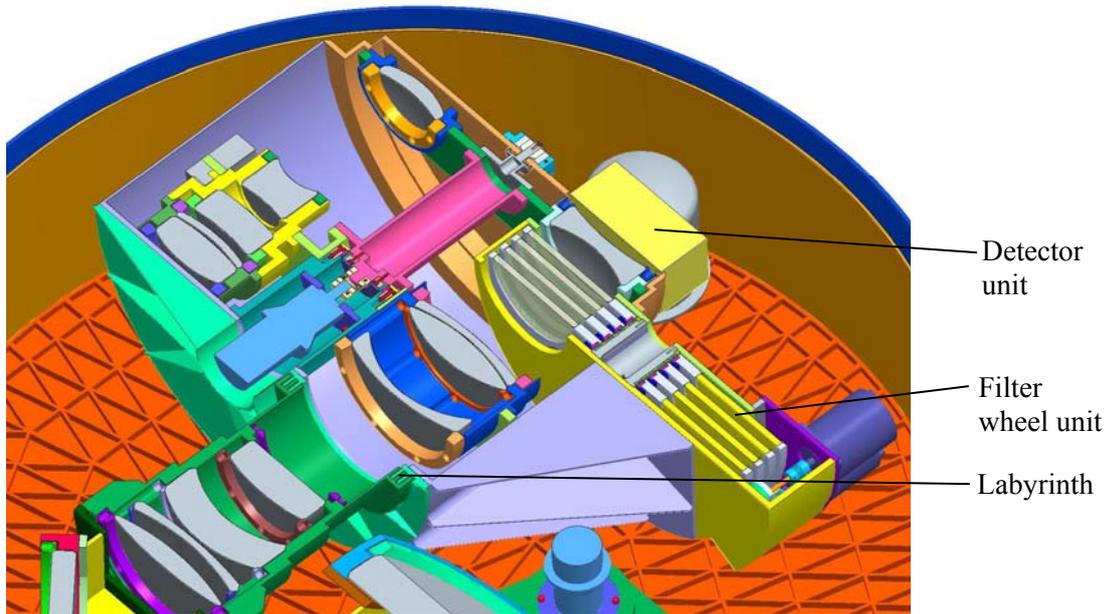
Detail view of optics wheel and filter unit
